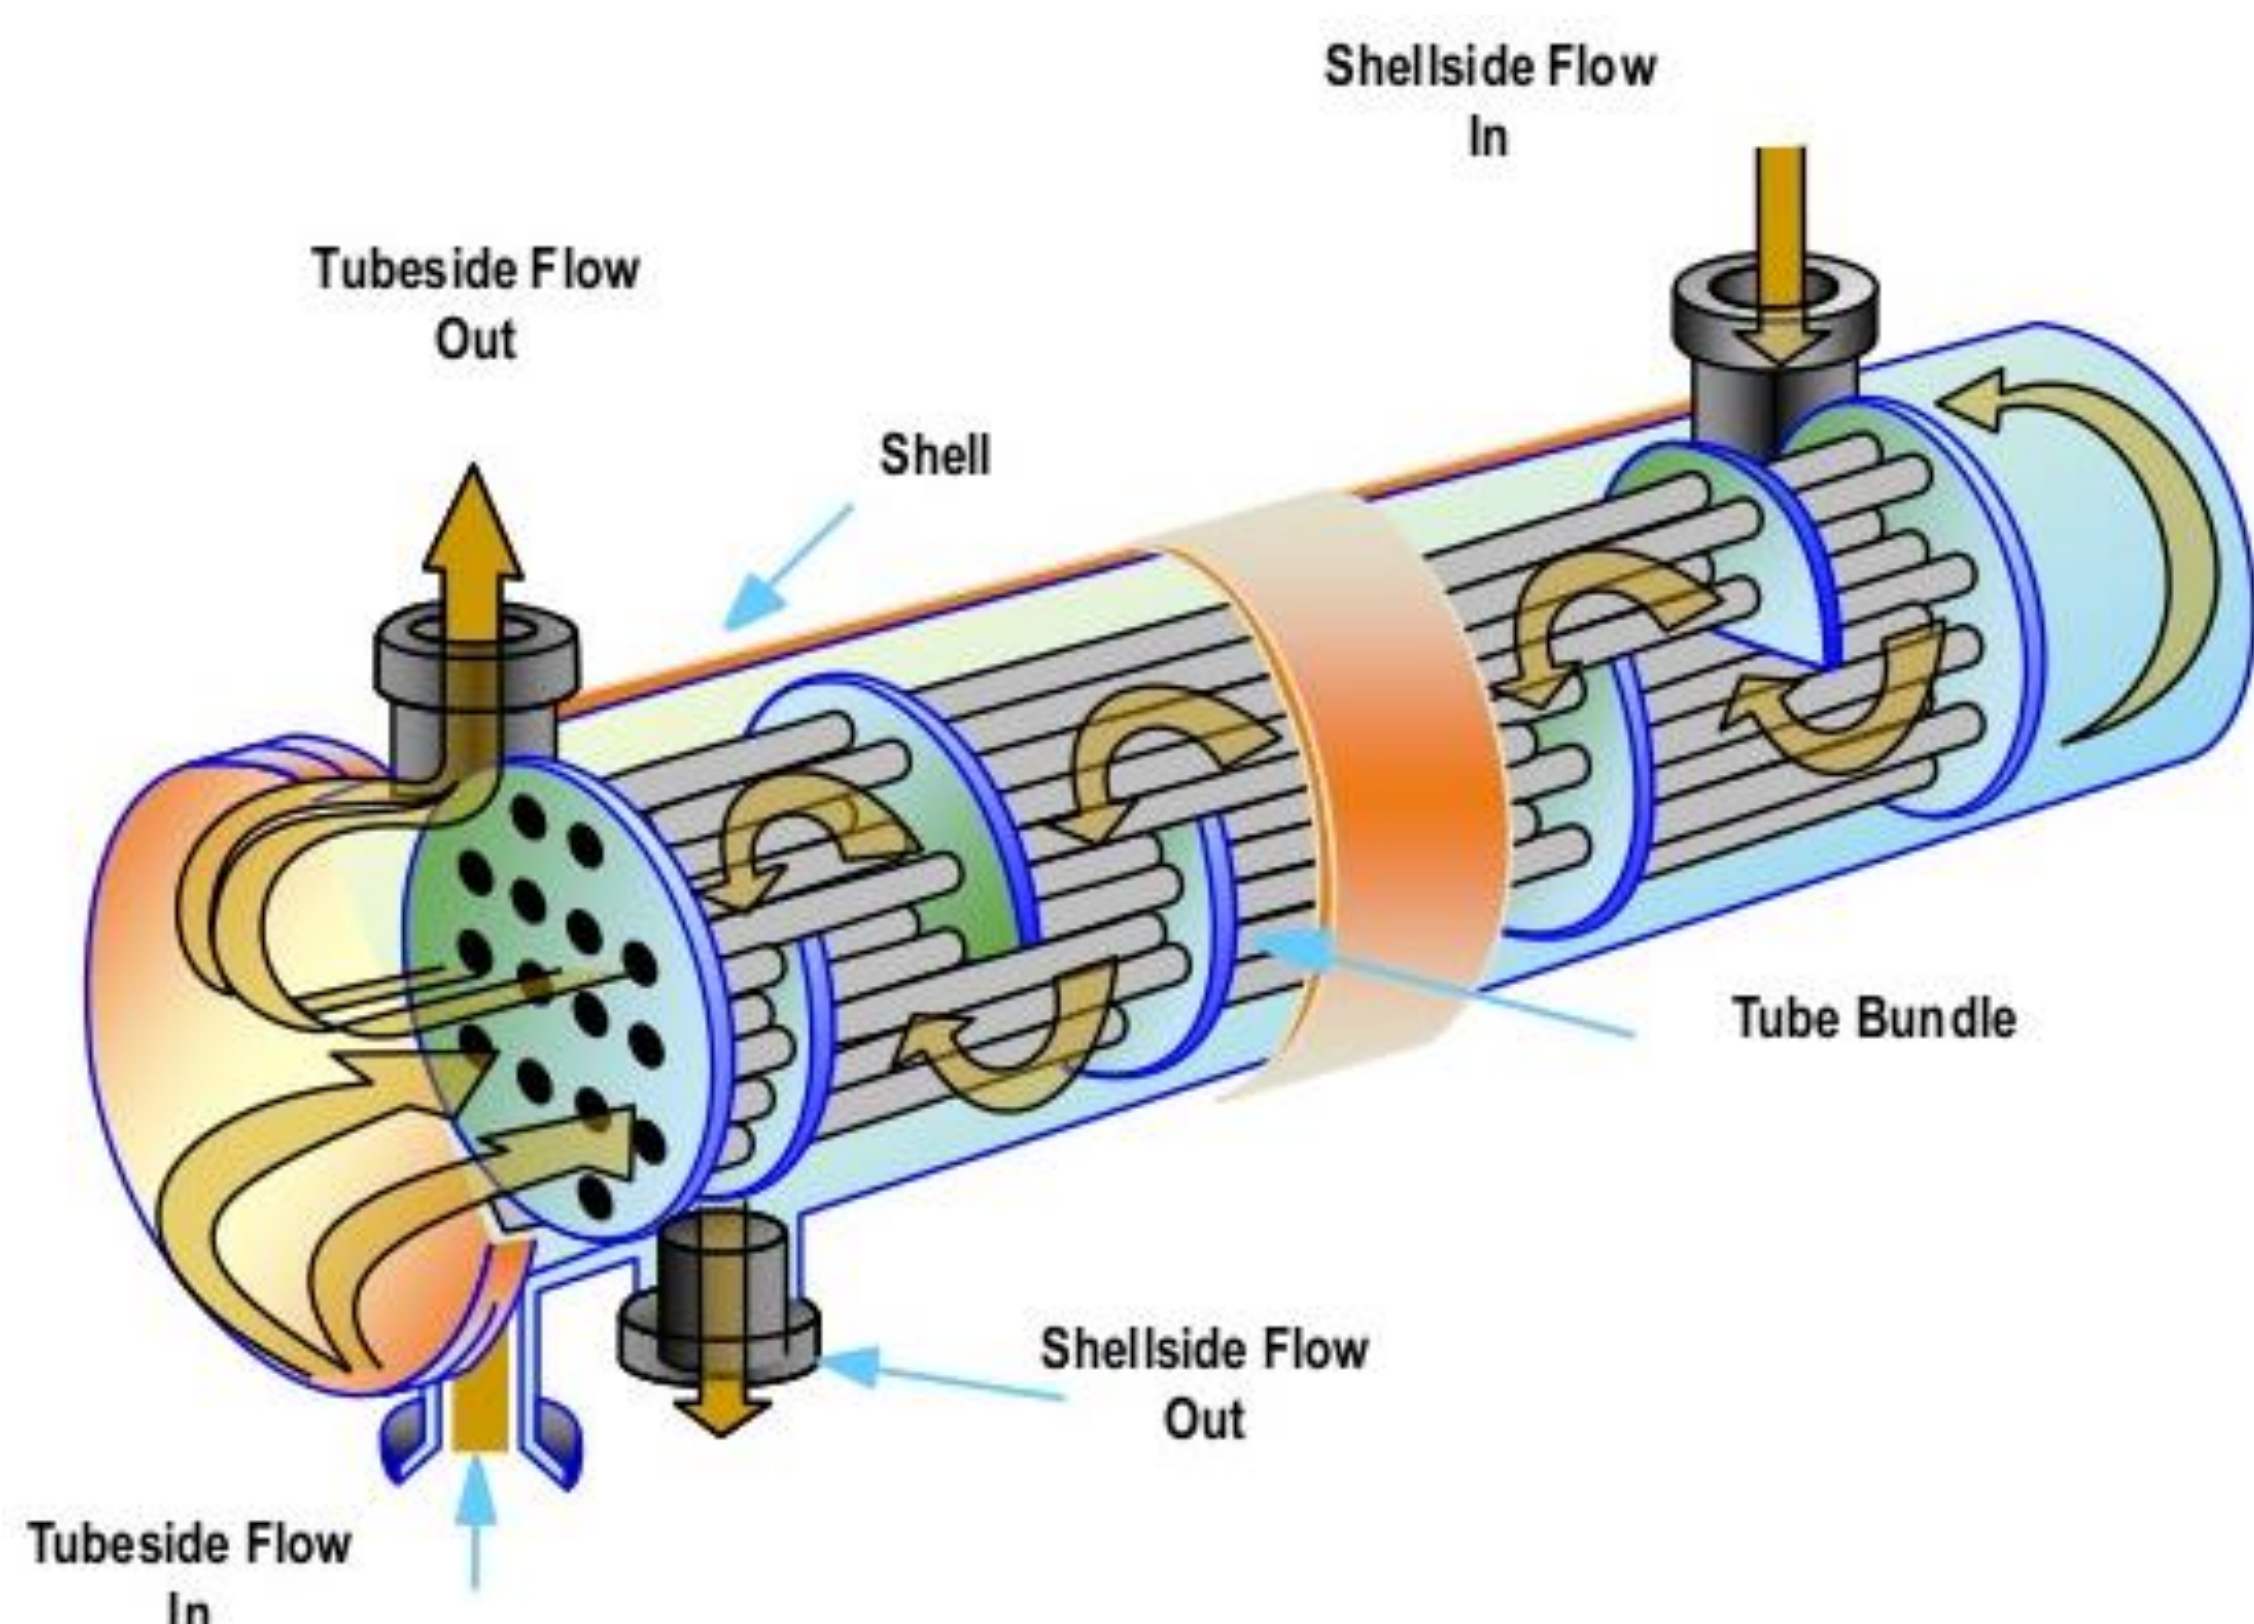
A Shell and Tube Heat Exchanger with one shell pass and one tube pass (cross counter flow)
